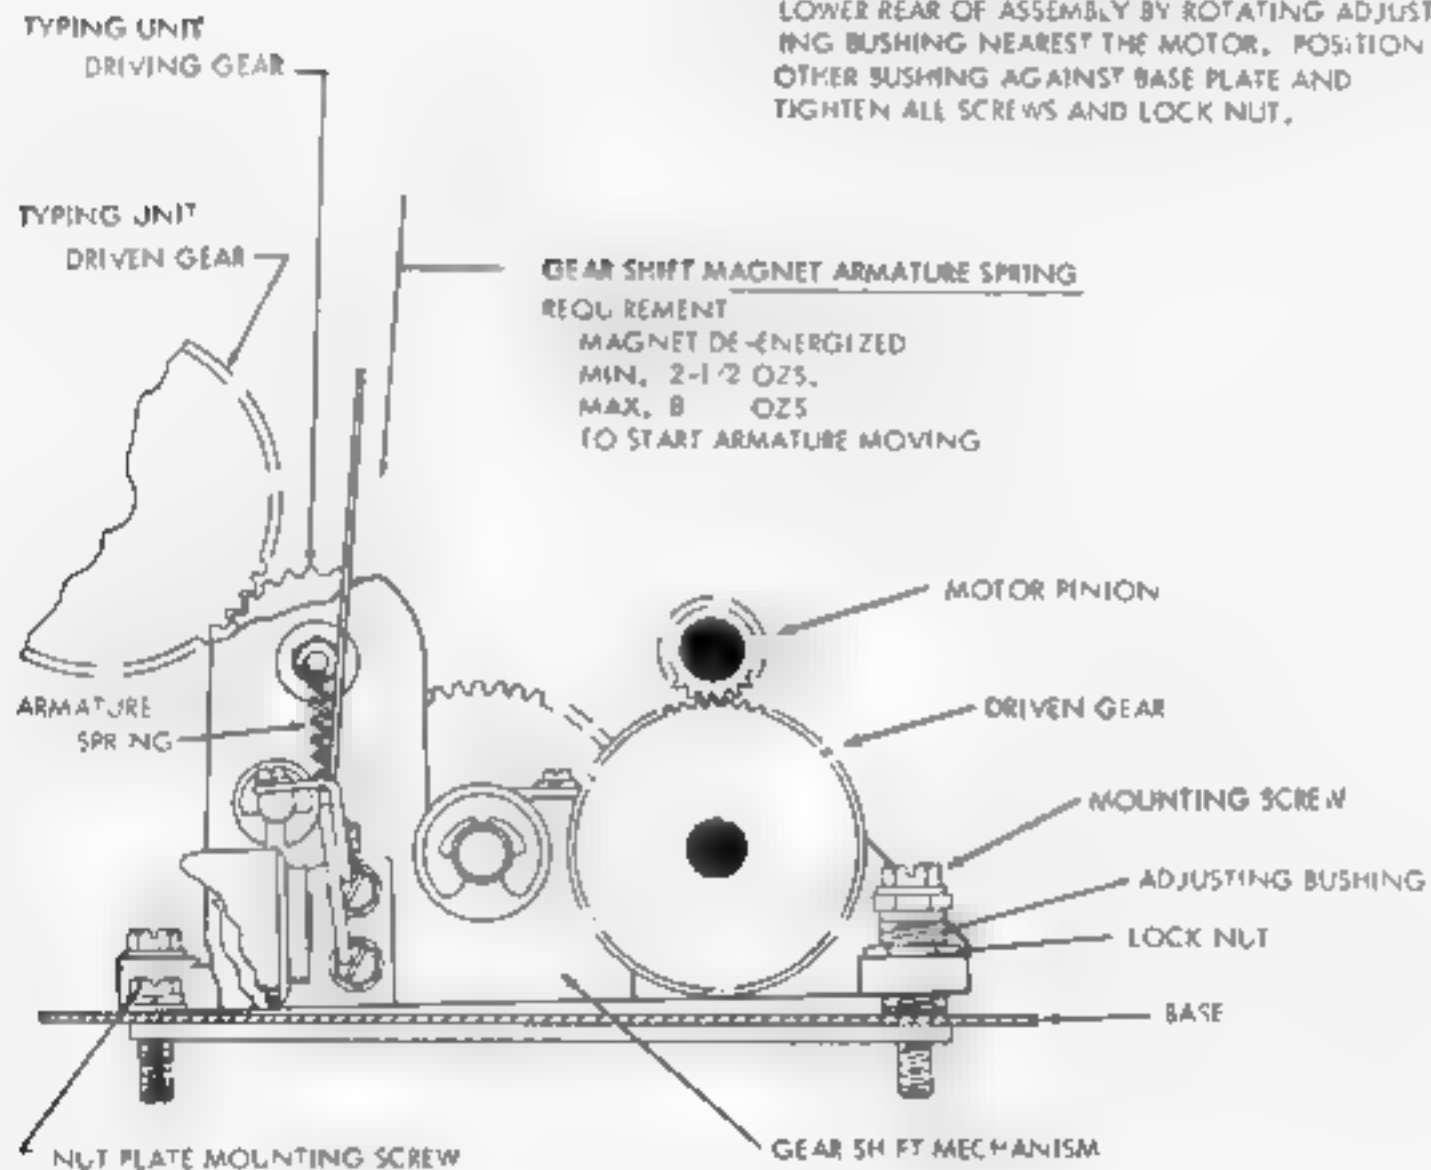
REMOTE CONTROL GEAR SHIFT MECHANISM
